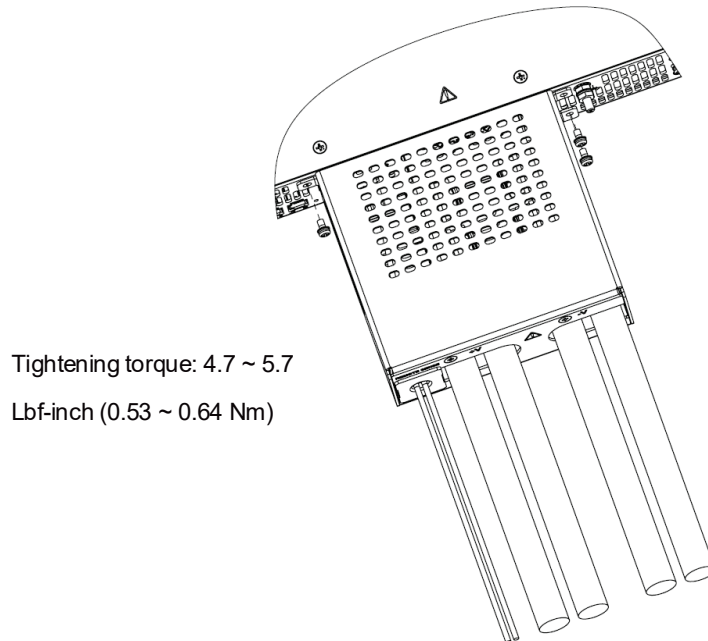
Fixing Bus Bars Protection Assembly to the Rear Panel
